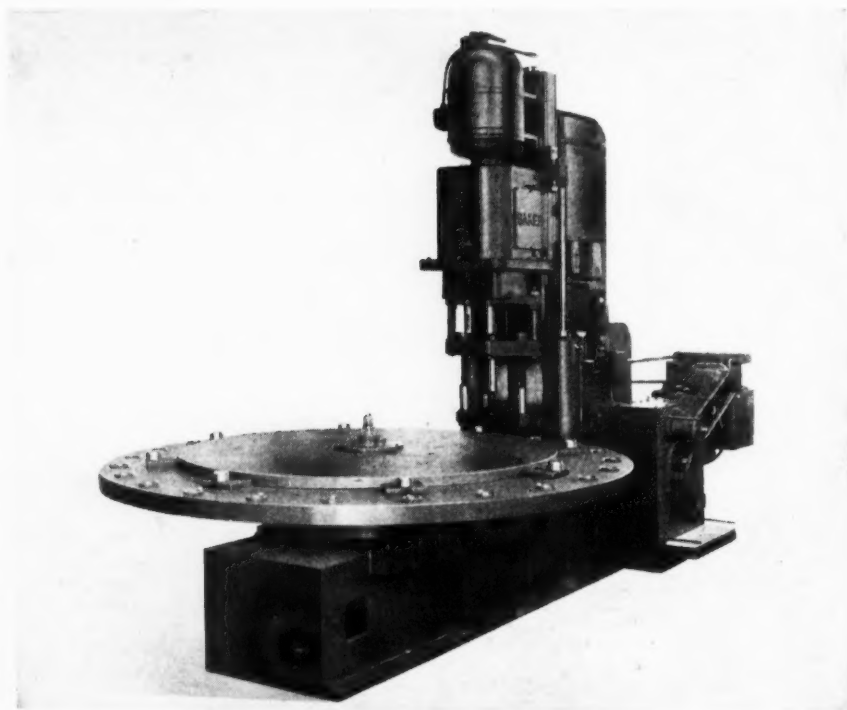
Baker Two-spindle Multiple-head Machine with Power Indexing Table and Work-holding Fixture Plate for Counterboring Holes in Turret Ring
